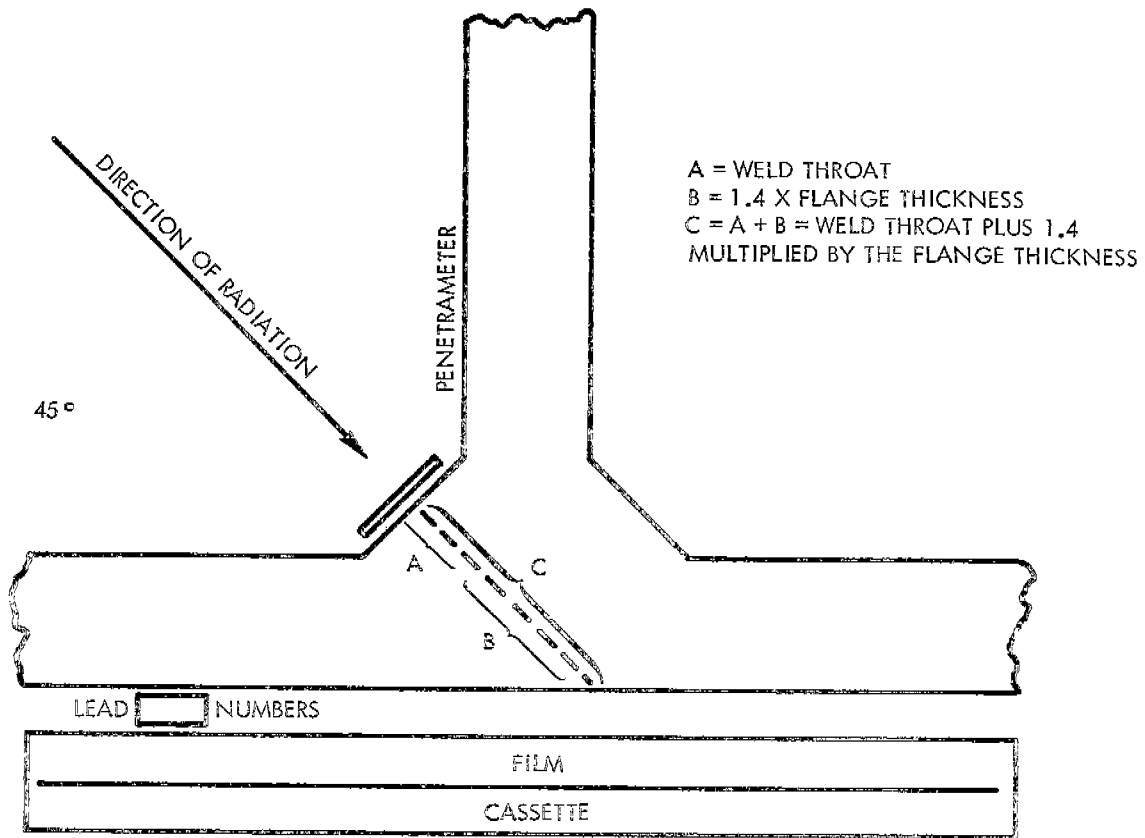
A ARRANGEMENT FOR THE RADIOGRAPHY OF T-JOINT WELDS
